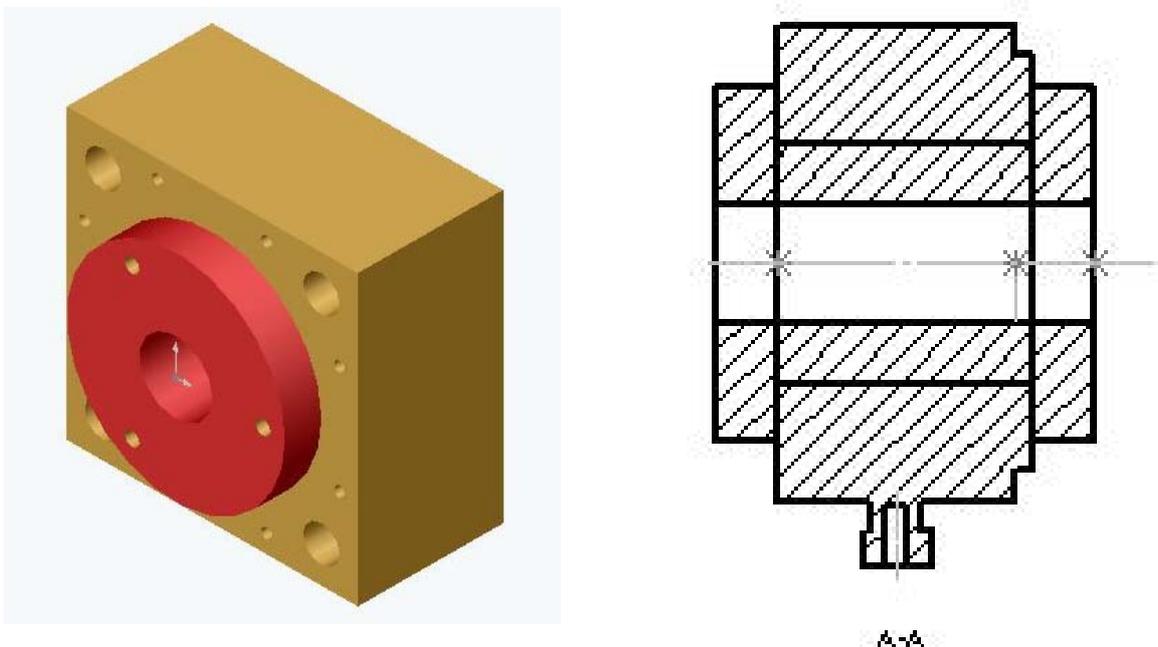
Air bearing version A used to support the lever, 3D and sectioning shows version A / "H" type . LLH4040
